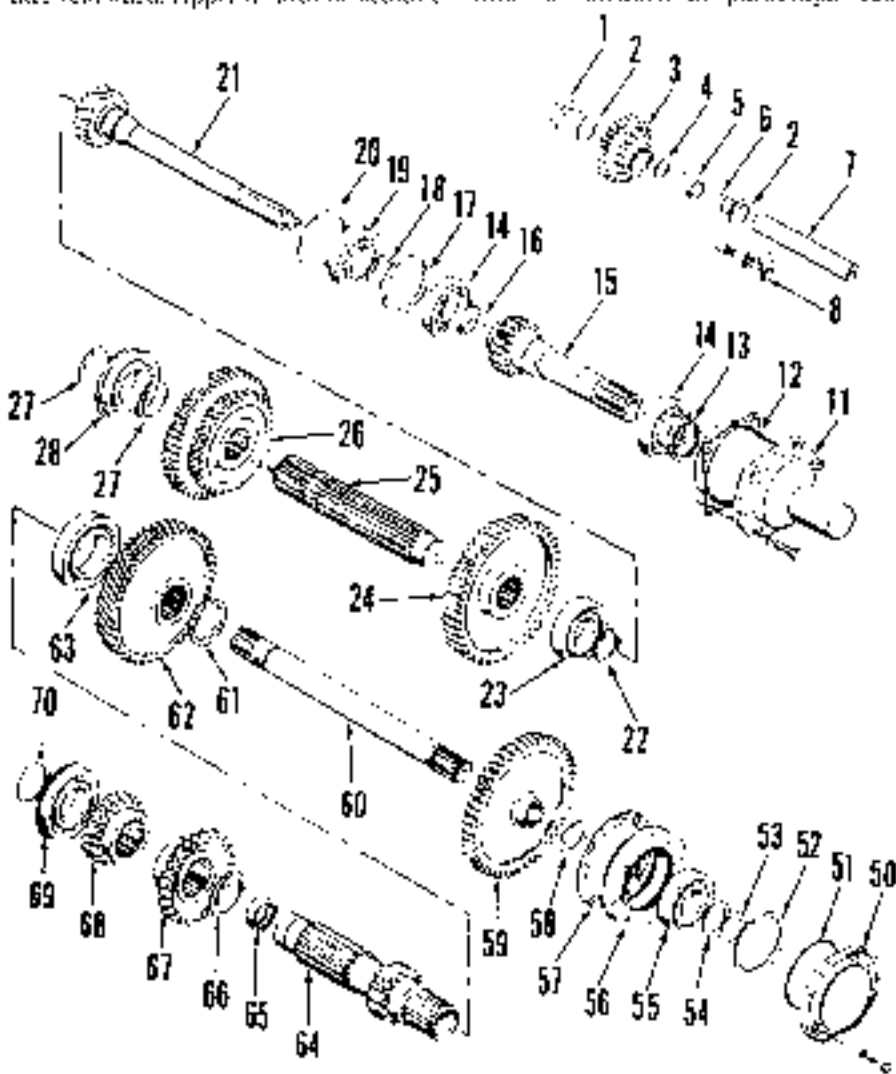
Exploded view of six-speed transmission gears, shafts and related components. Planetary unit is shown in Fig. 124.
